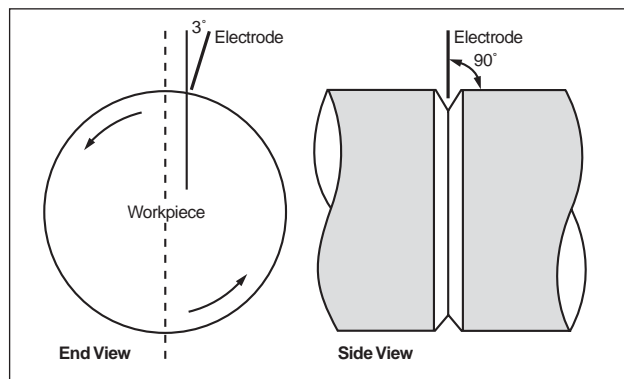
Optimum electrode position for submerged-arc circumferential welding.
